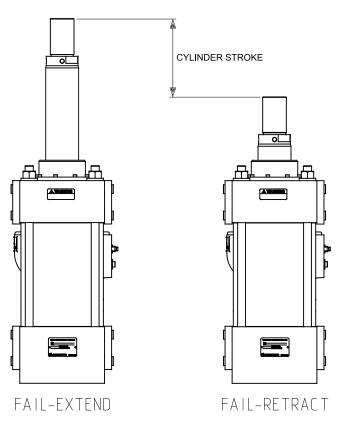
Hydraulic Rod Position for Different Cylinder Versions
